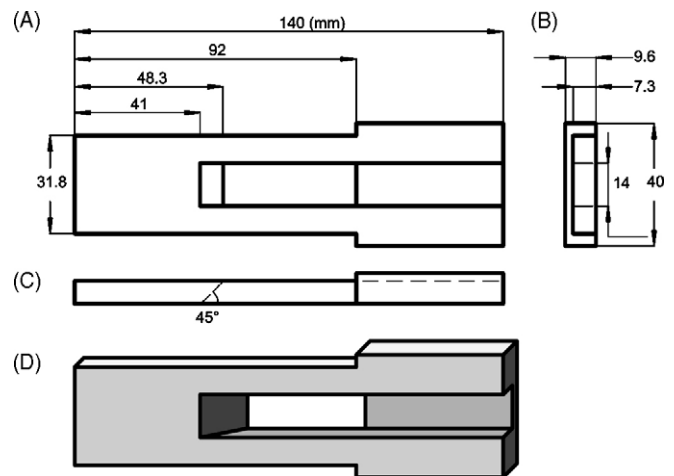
Layout of the laser insert for an Olympus microscope (BX51WI). (A) Drawing of the device as it would be viewed when inserted into the microscope from the user's perspective. (B) Drawing of the end view. (C) Drawing of the view from top edge. (D) 3D view. Suggested material: aluminum, all measures are in mm. A CAD drawing of this insert is available upon request.
